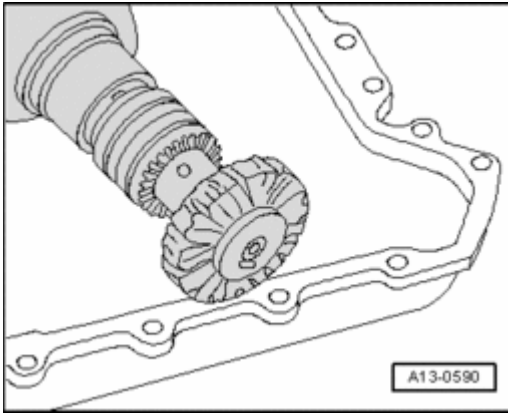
Using Rotating Plastic Brush To Remove Sealant Residue On Timing Chain Covers And On Cylinder Block And Cylinder Head
